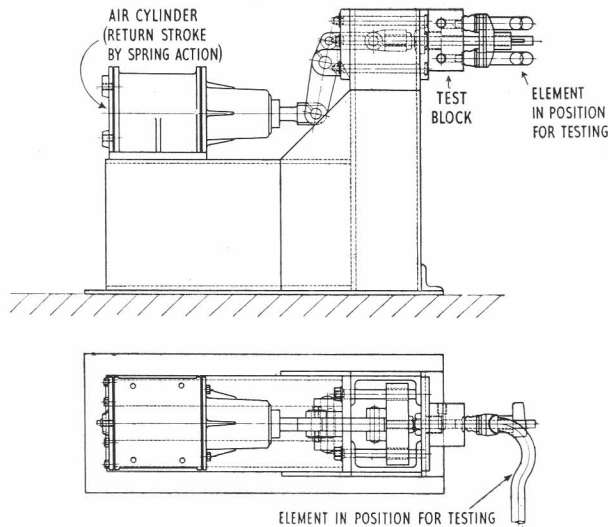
Hydraulic Testing of Ball Joint Elements. Test Pressure 1250 lbs./sq. in.
